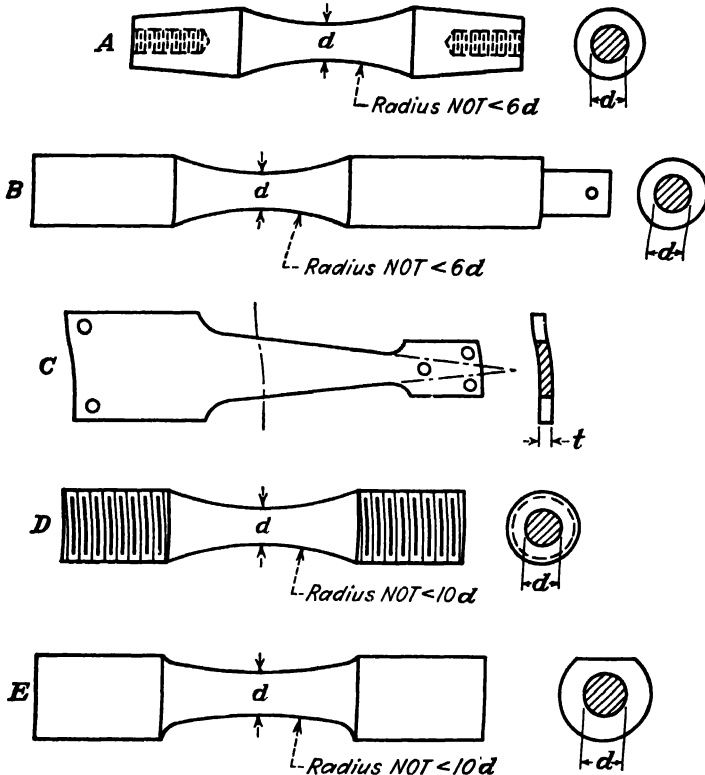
Types of fatigue specimens: A, rotating-beam specimen (reversed flexure); B, rotating cantilever beam specimen (reversed flexure); C, plate or sheet vibratory specimen (any stress ratio R); D, tension-compression ("push-pull") specimen (any stress ratio R); E, torsion-fatigue specimen (any stress ratio R).
